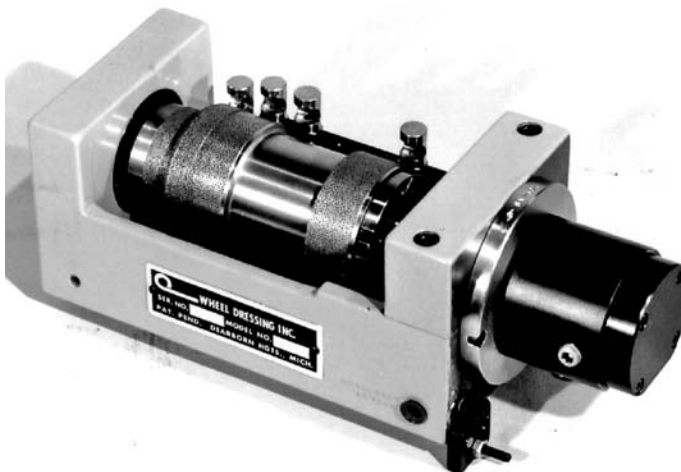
DFW-HTG plunge hydraulic dresser spindle.
